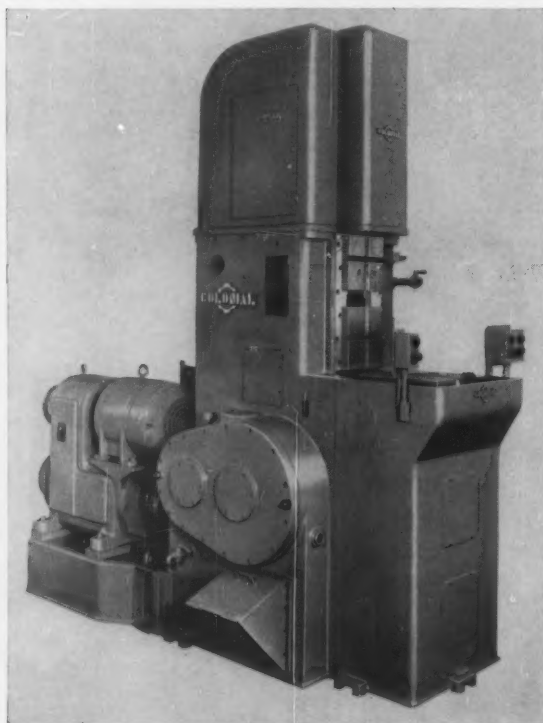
"One-Way" surface broaching machine built by the Colonial Broach & Machine Co.
